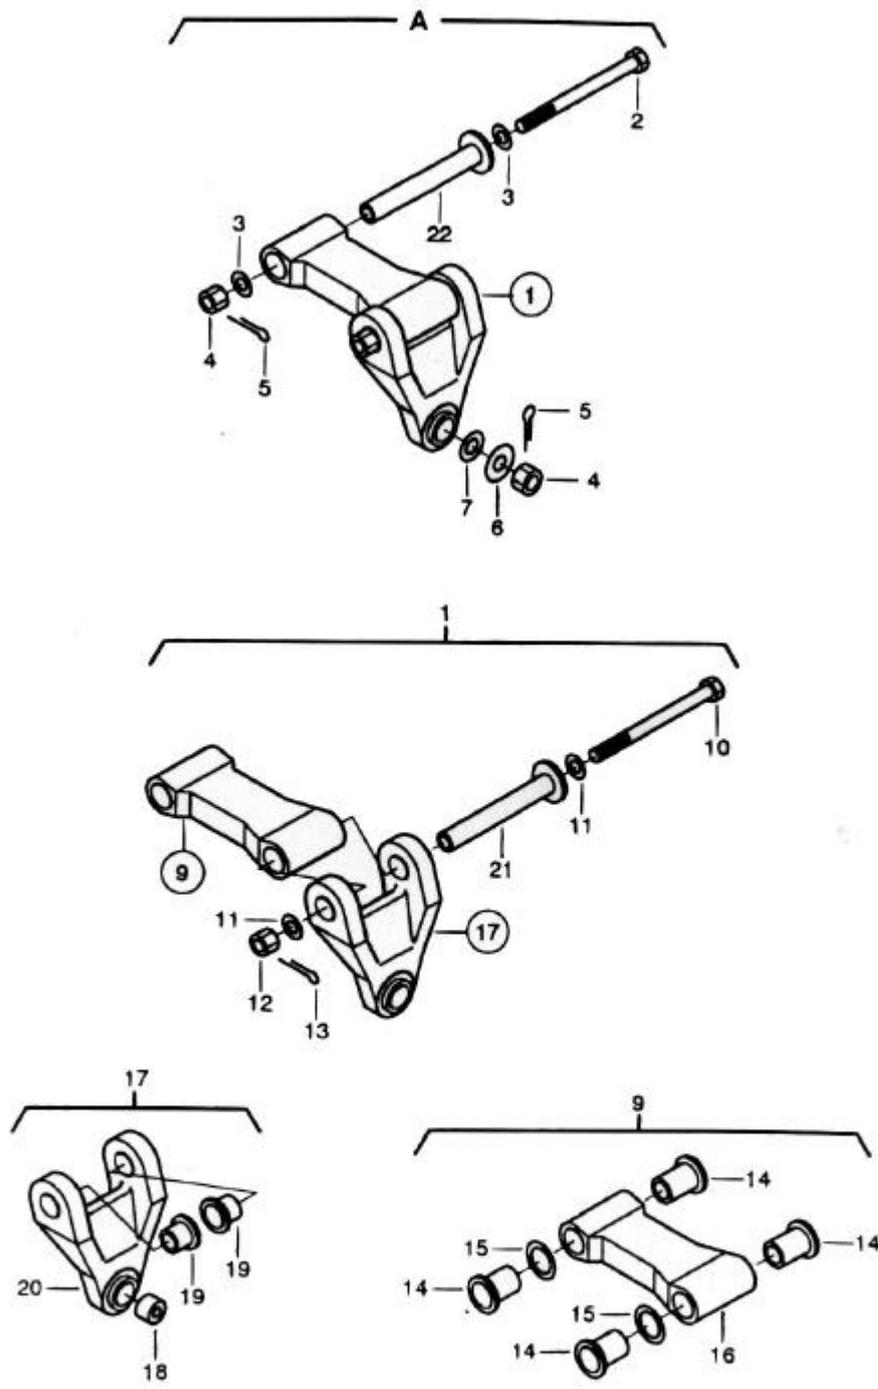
(SHEET 2 OF 3). ROTARY CONTROL INSTL, MAIN ROTOR
